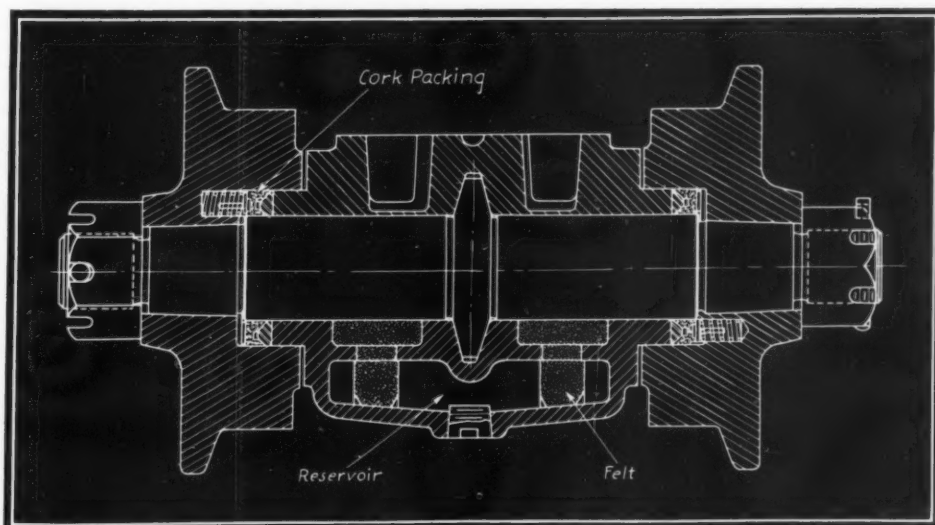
Cross-sectional view of track roller shaft bearing. These bearings may be partially submerged for hours in sand, grit or other abrasives. Efficient precautions are taken for protection against wear, as evidenced by the packing seal and provision for ample lubrication
